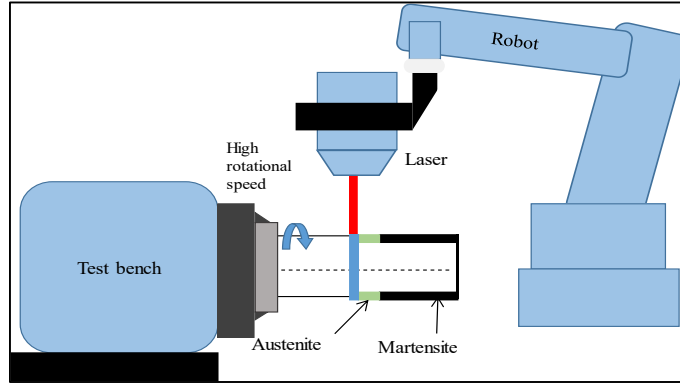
Basic Configuration of the laser hardening a cylindrical piece.
